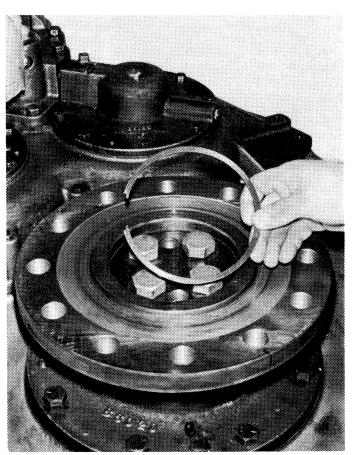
Snap Ring Removed from Bore of Output Flange.
